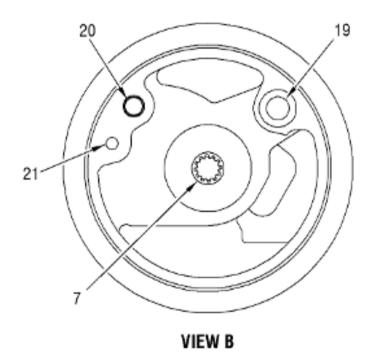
(Sheet 1) FMU and Grooved Clamp Coupling - Inspection * FOR CT7-2E1
